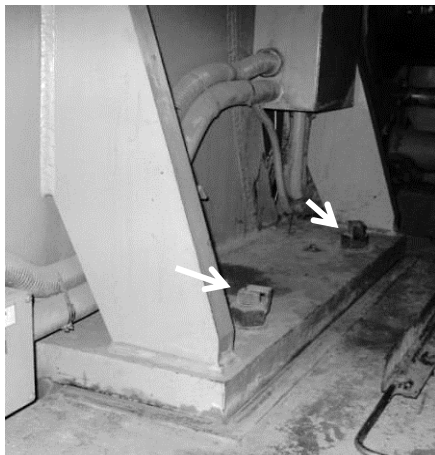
Bearing 4 Pedestal & Soleplate LPA Right Side.
